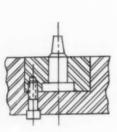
Core retained in insert. Insert held in die block by cap screws.
